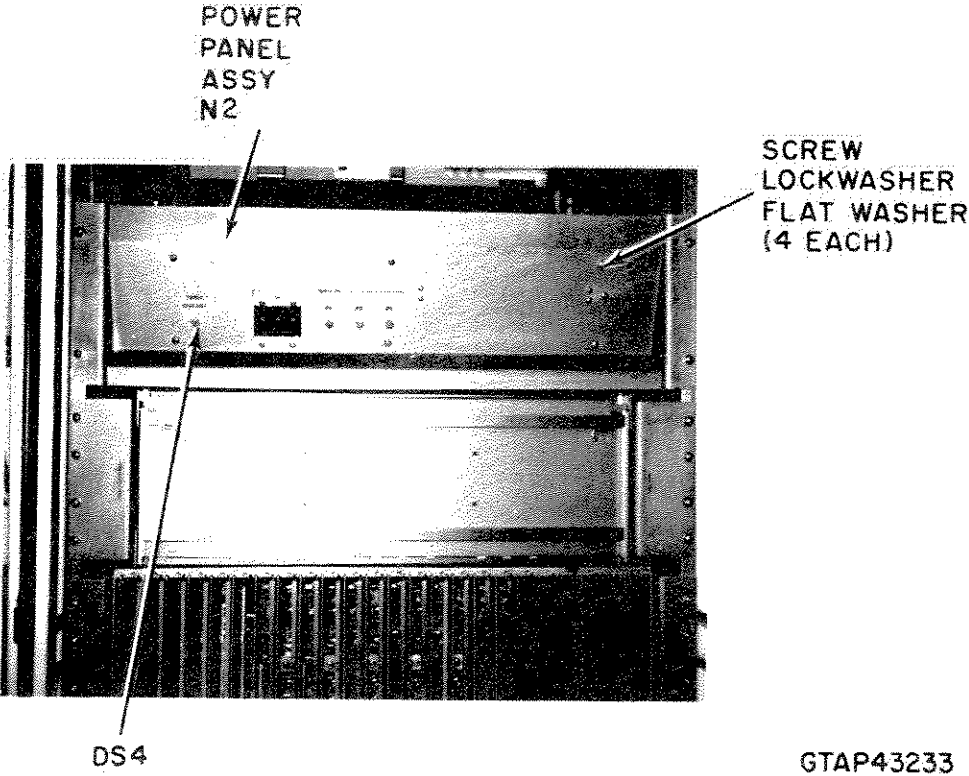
Transmit Beamformer Cabinet, Unit 150, Power Panel Assembly N2 (Front View)
